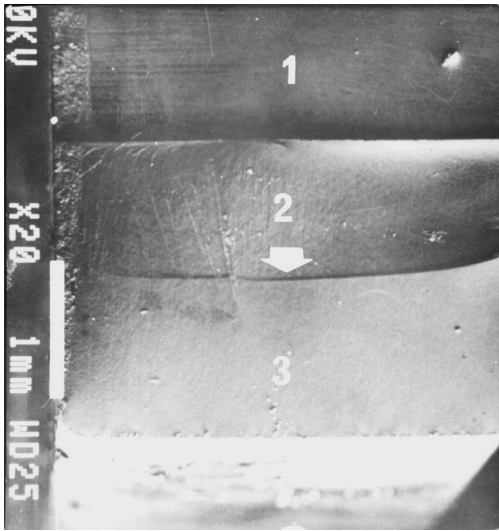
Fracture surface of the specimen (SEPB method): 1 — saw notch, 2 — precrack front, 3 — fast fracture region.
